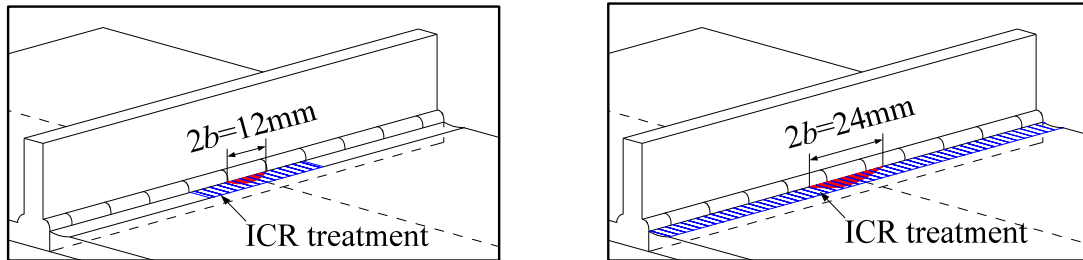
ICR Treatment for Fillet Welded Joints
